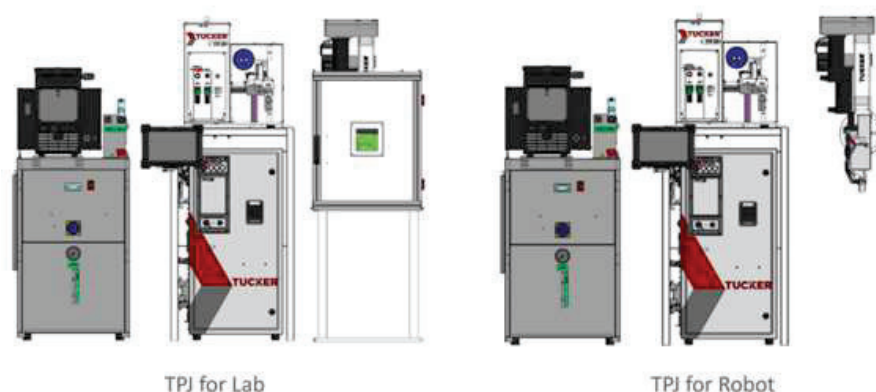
TPJ equipment drawings in static laboratory workstation (left) and for robot mounting (right)
